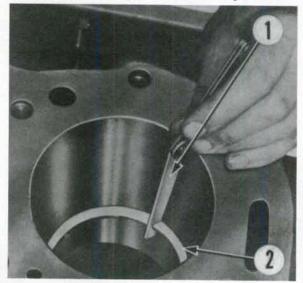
Piston ring end gap of each ring (2), fitted in the cylinder in which it will be installed, should be checked with a feeler gage (1) as shown.
